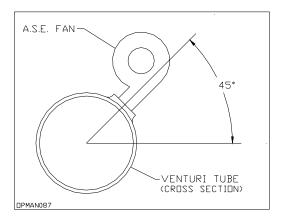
12: Mounting the ASE Fan on a horizontal mounted Venturi Tube
